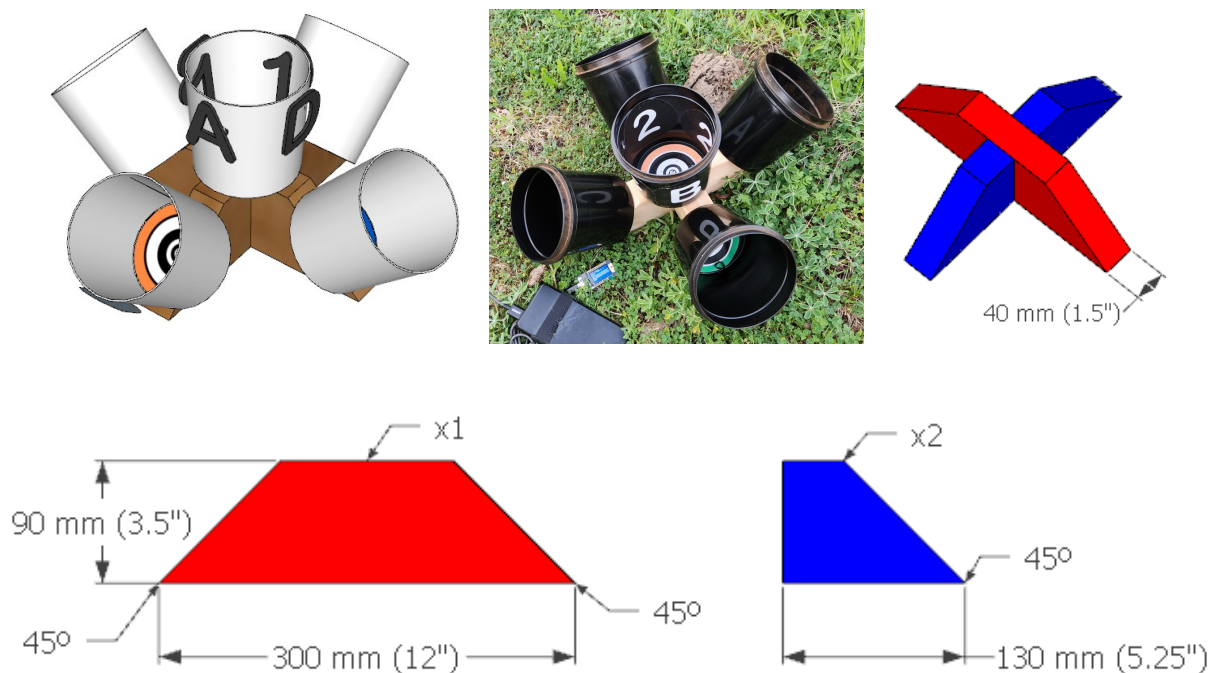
An example of constructing the Bucket Stands out of small plastic tubs and “2x4” dimensional timber (actual cross-sectional dimensions of 3.5”x1.5” or approx
